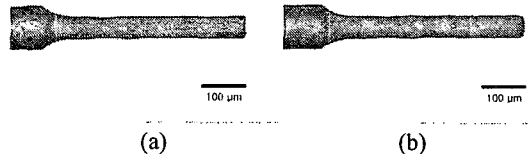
Tool electrode for micro EDM (a) before machining (b) after machining
